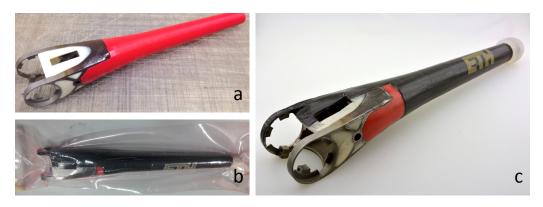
Manufacturing of the lower leg: assembled inner tooling with FDM and SLM load introduction (a), vacuum bagging (b) and cured part (c)
